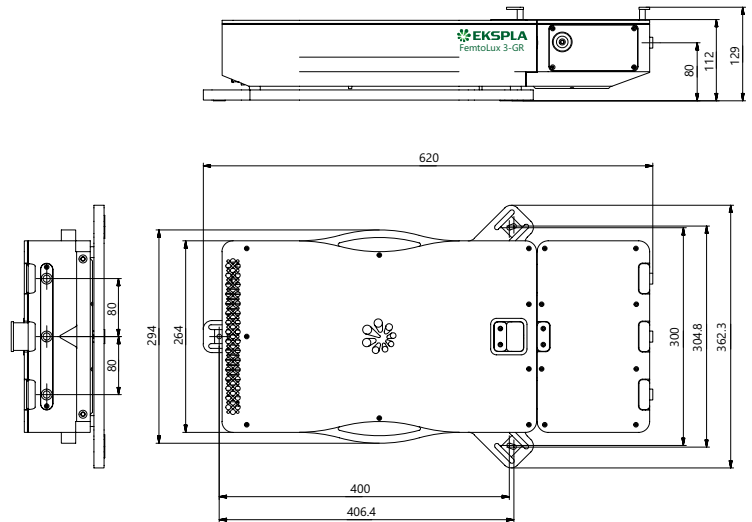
Outline drawings of FemtoLux 3-GR laser head with second harmonic option
